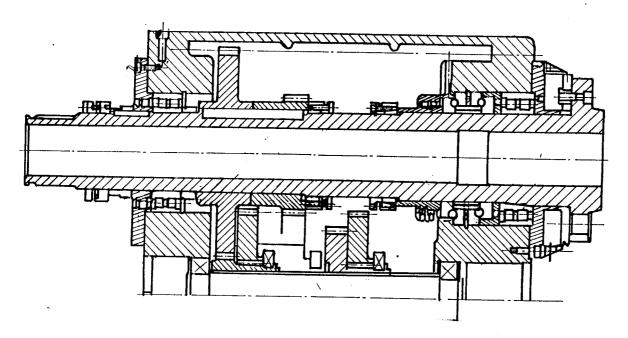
Spindle for CNC-Universal Turning Machine(DN/DNE)
